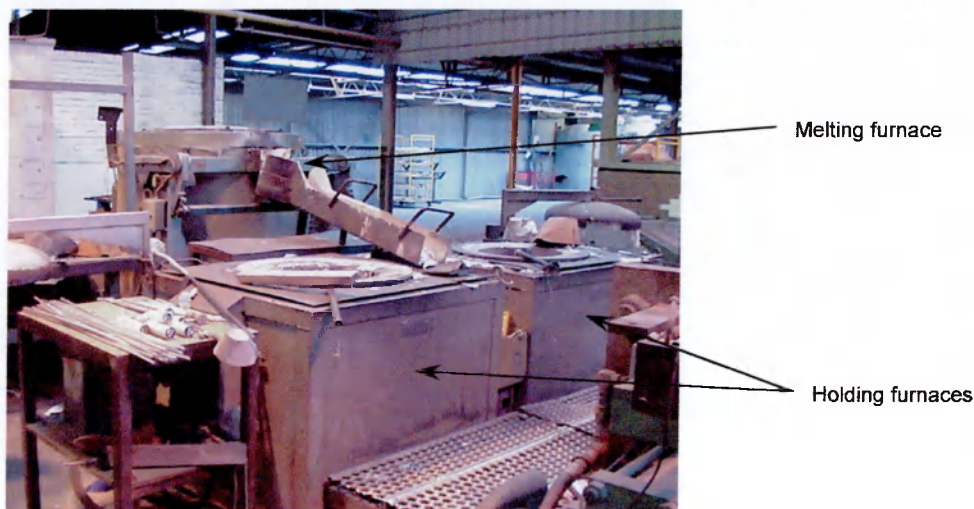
Arrangement of melting & holding furnaces in Foundry A's diecasting cells.
